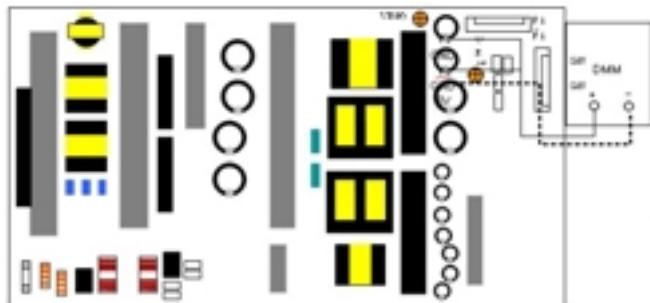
42inch Power PCB Assy Voltage Adjustment
